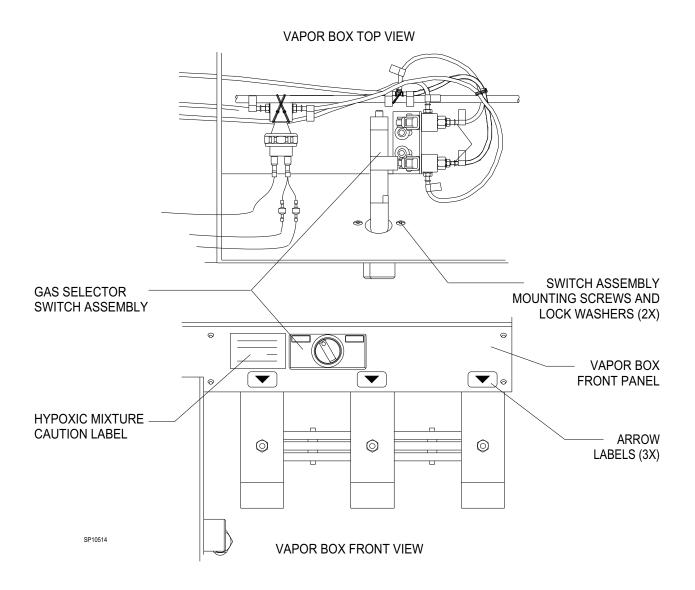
GAS SELECTOR SWITCH ASSEMBLY
